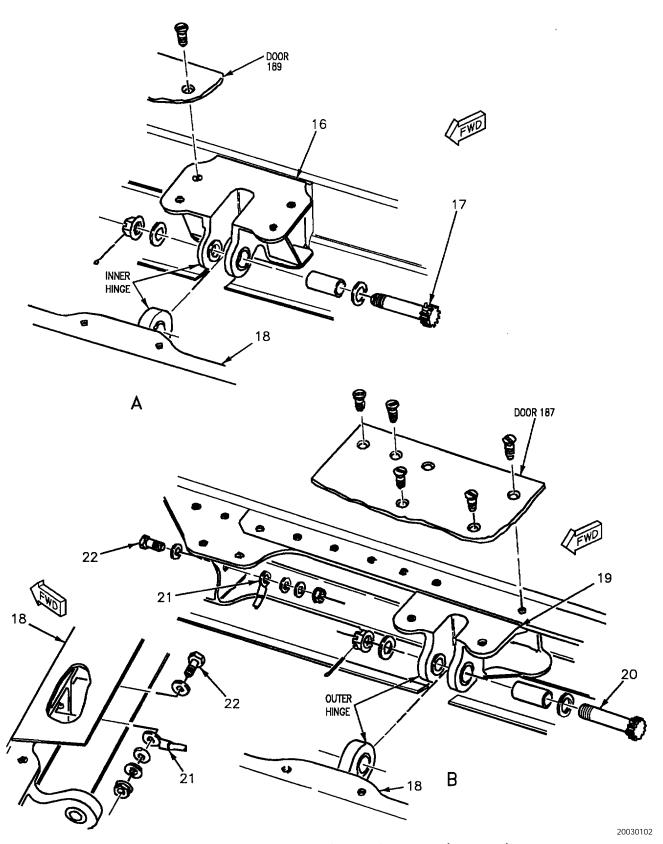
Outer Wing Leading Edge Flap (Sheet 2)
